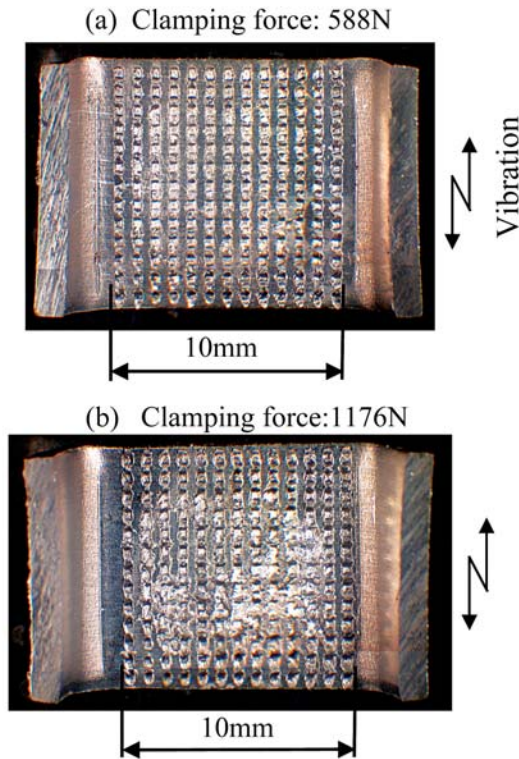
The appearances of scratches on A5052 surface formed by a welding tip with pyramidal projections. (a): Clamping force of 588N, (b): Clamping force of 1176N
